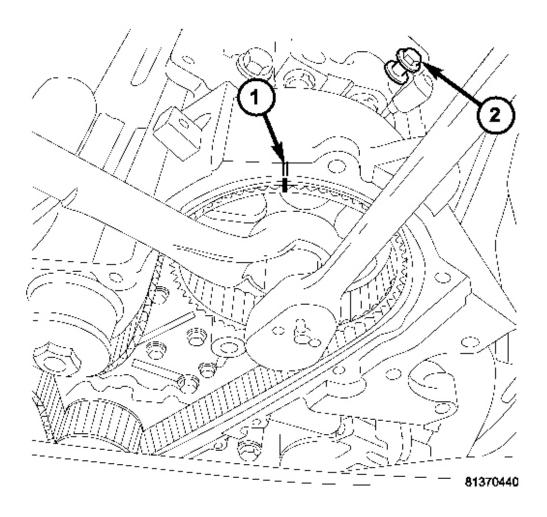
Left Camshaft Sprocket Courtesy of CHRYSLER LLC
